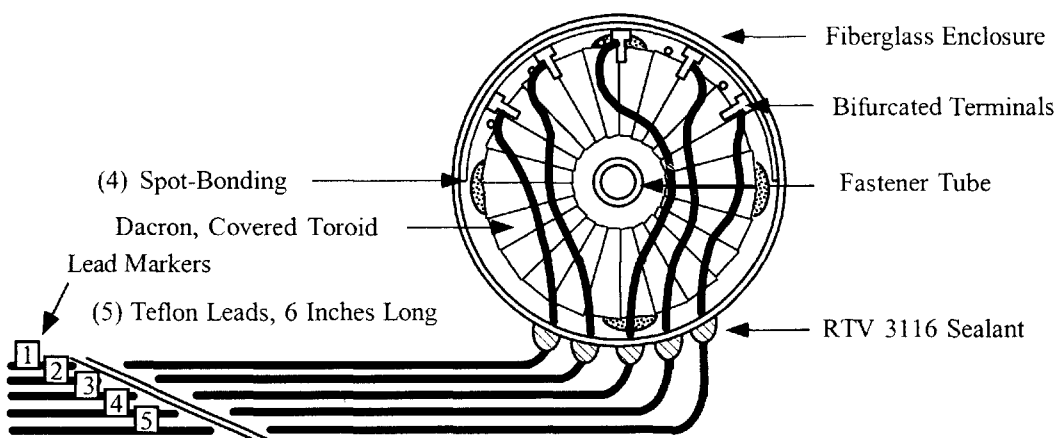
Typical, Magnetic Component in Final Assembly.
